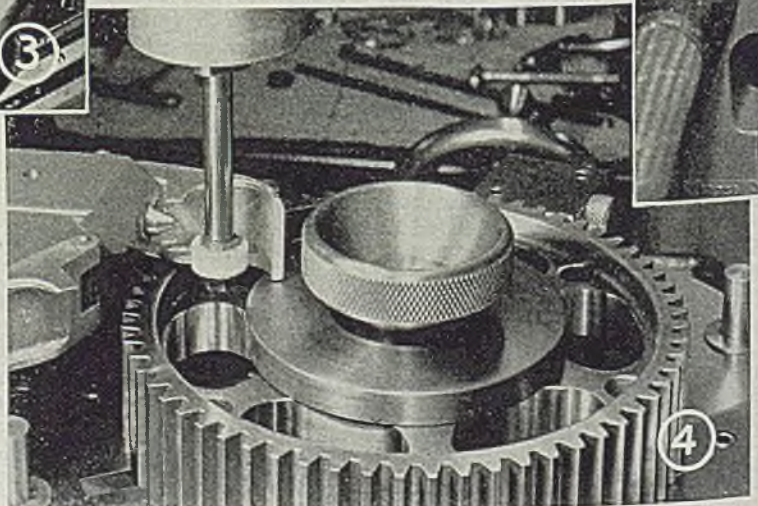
Cup-shaped gear (A in Fig. 2) mounted in fixture on jig grinder. Wheel makes two passes in each of eight straight, round holes—0.001-in. being left for final pass. Indexing turret at rear holds two diamonds. One dresses wheel for roughing, the other for finishing
